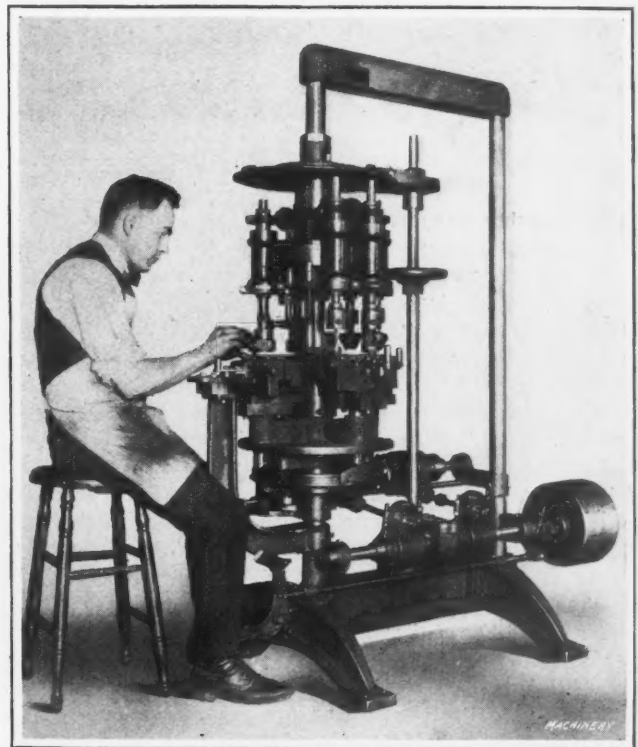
Vertical Automatic Chucking Machine built by the Long-Henkel Mfg. Co.
